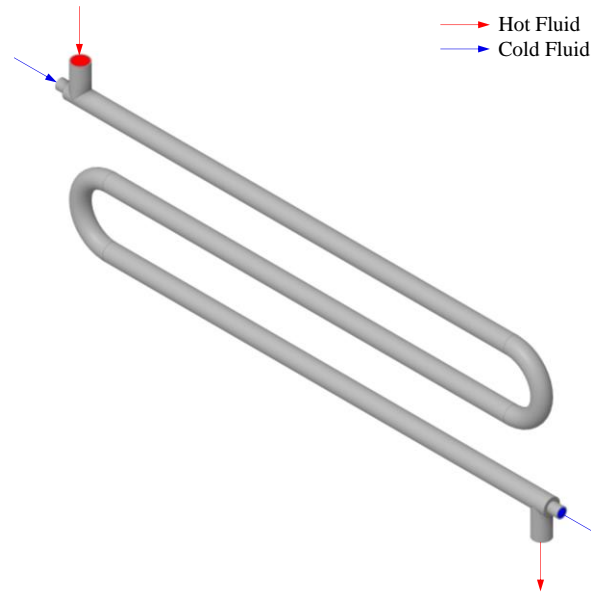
The schematic showing the dimensions of the double pipe HE design.
